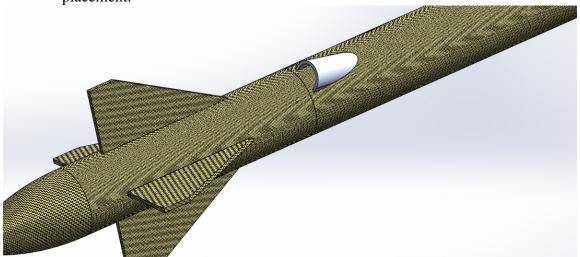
The camera protrudes out the side of the dart airframe at the camera shroud, which is designed to reduce drag that would otherwise we be caused by the camera alone.
